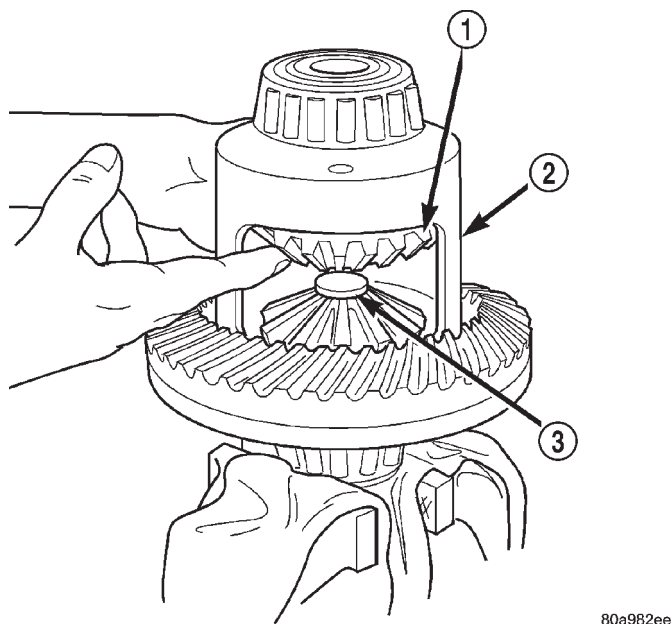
Clutch Discs & Lower Side Gear Installation
